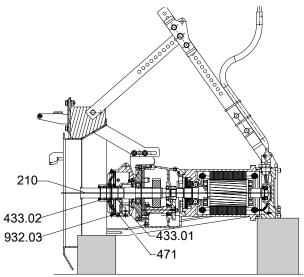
Removing the mechanical seal of an Amaline 500, 600
